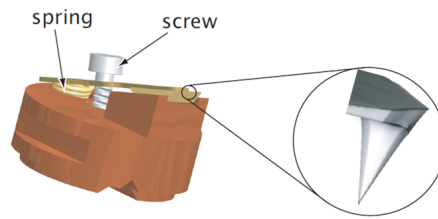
Representation of the cantilever holder. The chip is fixed through a lever screwed to the holder.
